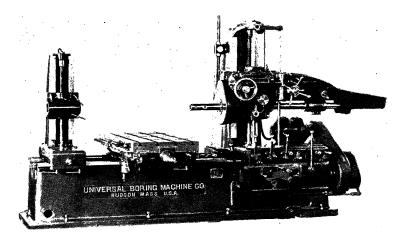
Horizontal boring machine. This machine, a descendant of Wilkinson's invention, is capable of boring holes to a high degree of accuracy. One of the principal reasons for this is the outboard bearing for the boring bar. This bearing is on the upright on the left. It reduces the deflection of the boring bar caused by the forces between the cutting tool and the work. (Universal Boring Machine Co.)
